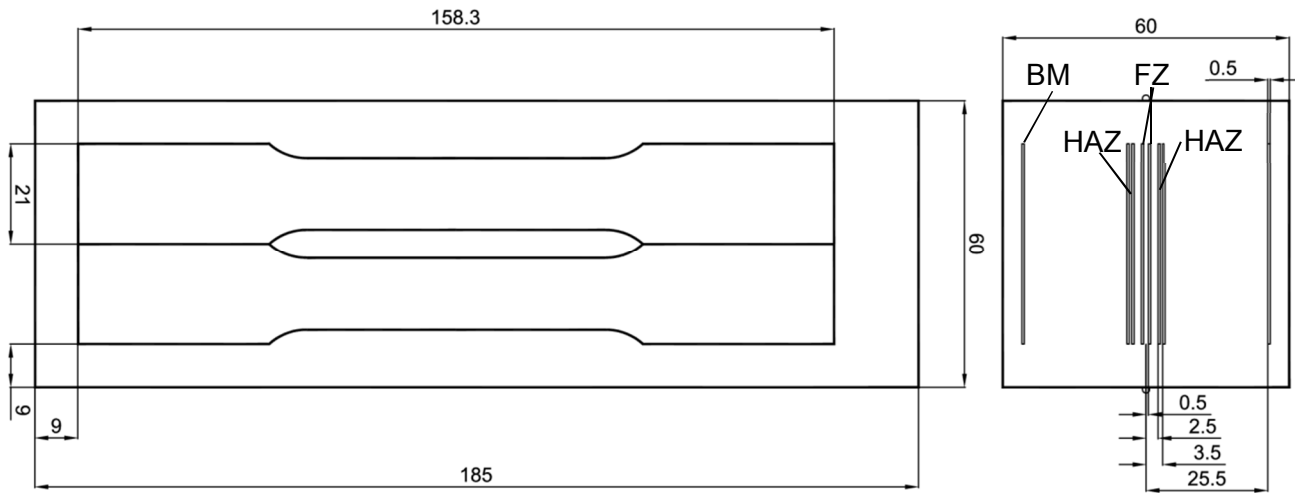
Sketch of extraction positions of manufacture blocks and the dimension of the flat specimens.
